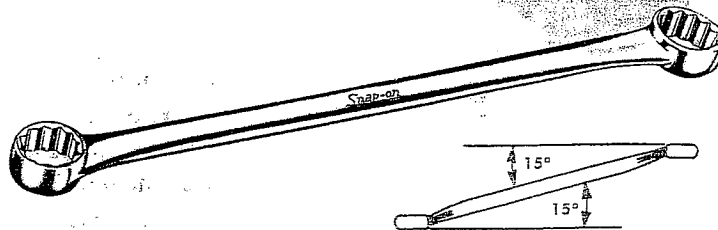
A box-end wrench fits all the way around a nut or bolt. (Snap-On Tools Corporation)
